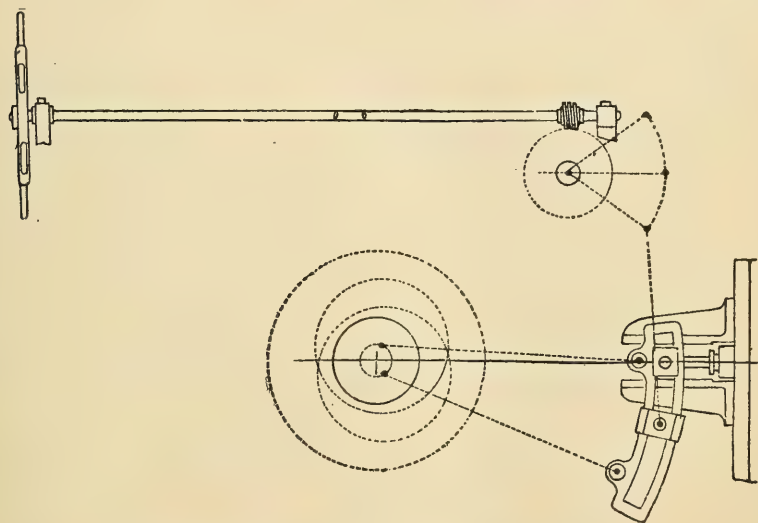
Link Motion and Starting Gear for Marine Engines.
